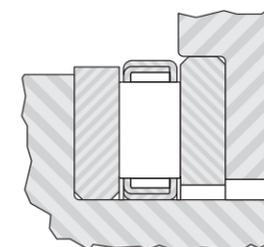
Typical mounting of a thrust bearing when the shaft rotates
